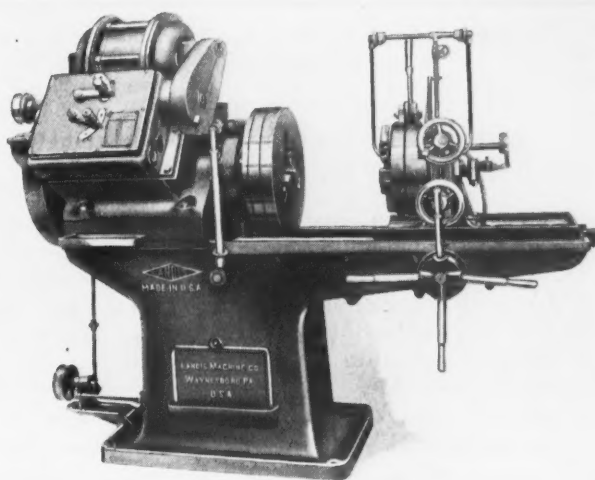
"Rapid Production" Lathe Designed for Carbide Cutting Tools
